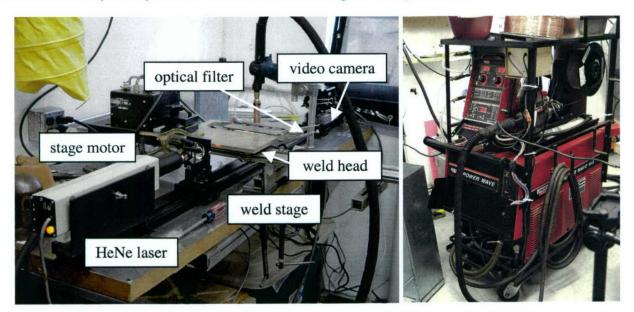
Photo of Welding Setup. The primary components (the laser backlight imaging system, titanium welder head, and Bug-O track to hold test piece) are shown on the left. The pulsed GMAW power supply is shown on the right.
